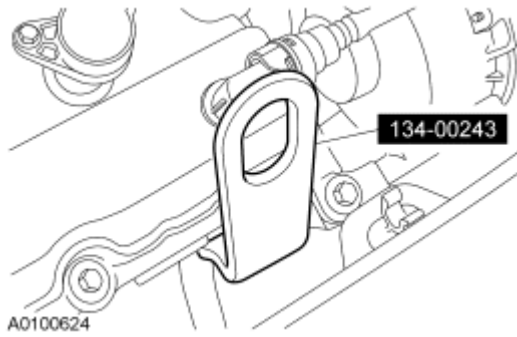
Special Tool Installed Onto LH Cylinder Head
